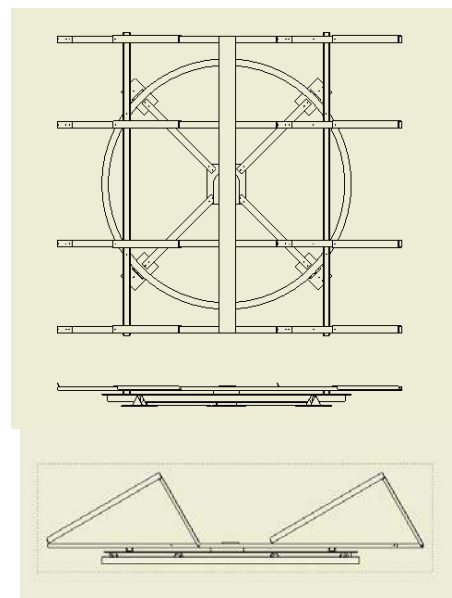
The drawing above is a top down view of a JXC Carousel Tracker without the PV modules. The middle drawing is an edge view with the module support arms folded down and the bottom drawing shows the carousel after the module support arms are raised and the PV modules are mounted.
